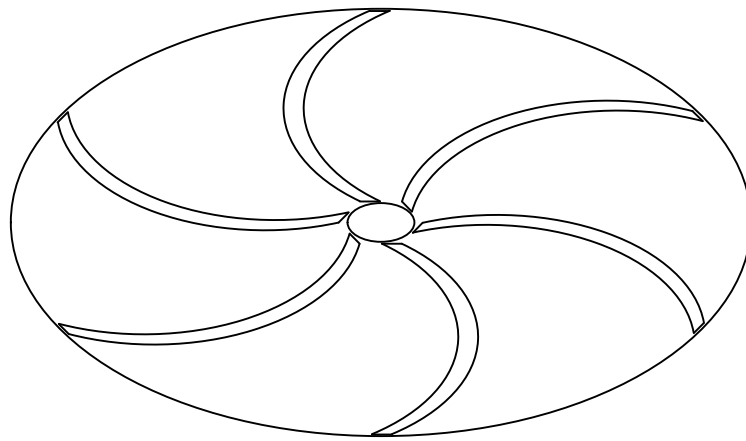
(b): Three Dimensional View of Five Bladed Vertical Axis Vane Type Rotor
